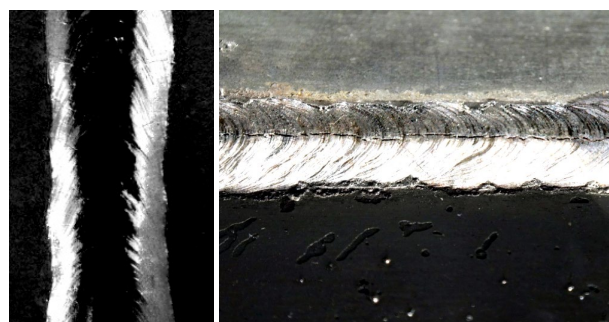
Examples of RTI renderings. Left: the width of a butt weld is highlighted. Right: weld spatter and lower weld transition of a hollow weld are highlighted.
